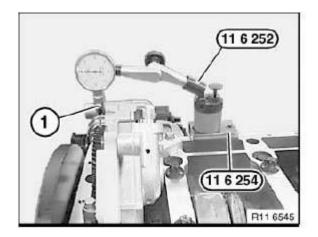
Identifying Special Tool 11 6 252 And 11 6 254 Courtesy of BMW OF NORTH AMERICA, INC.
